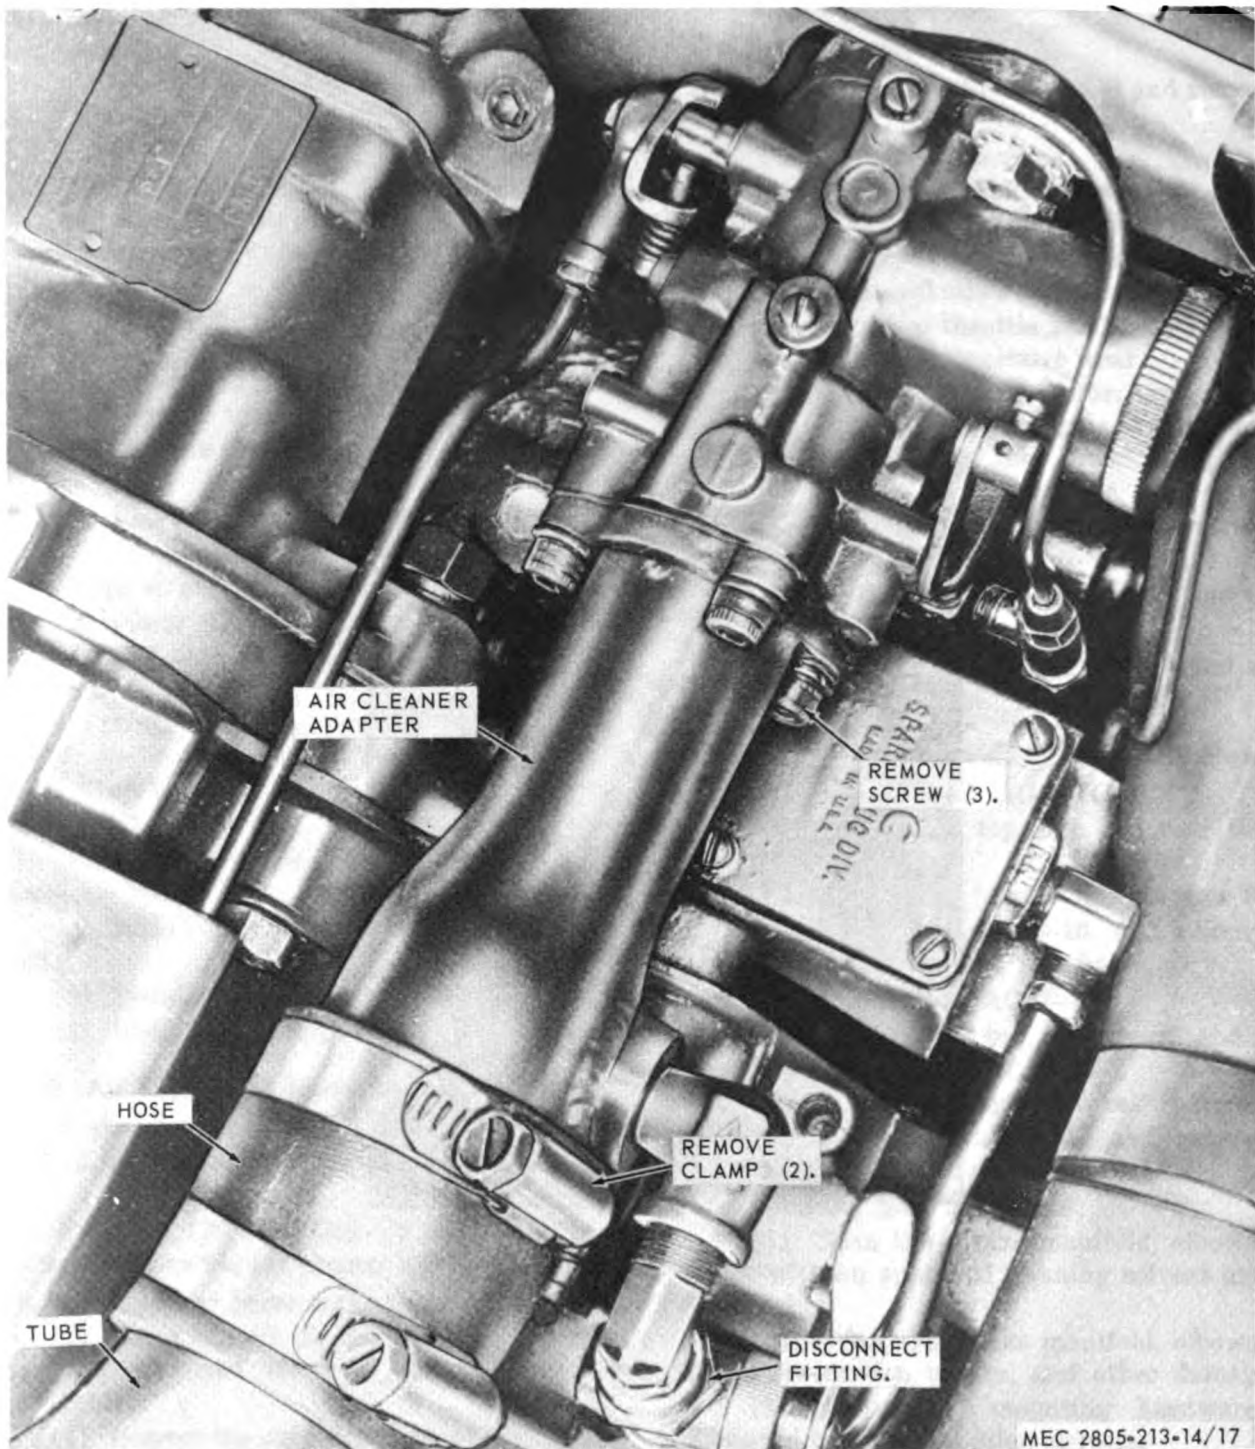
Air cleaner adapter and tube, removal and installation (Model AO42-KM).
